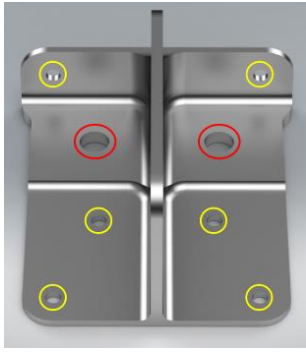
Fixing holes (Screws in red and rivets in yellow).
